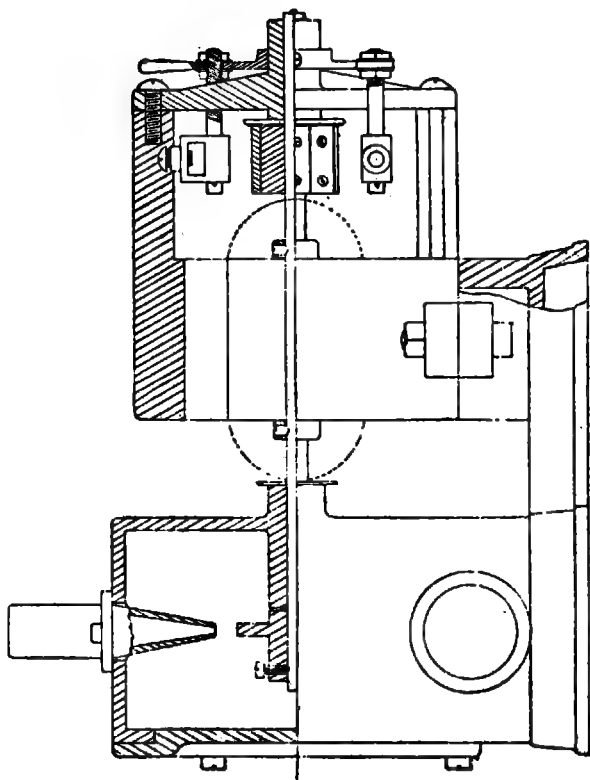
Part Sectional Side Elevation of Dynamo and Water Motor
